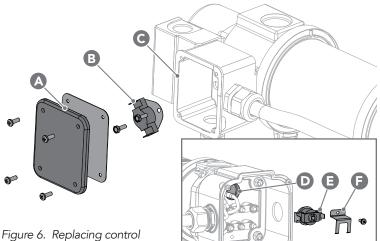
Replacing control (above) and high-limit (right) thermostat assemblies.
